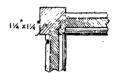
Horizontal Section through Plant Stand's Post and Wooden Panels.
